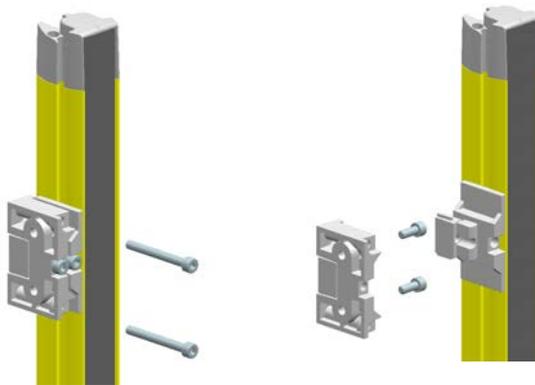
Mounting via swiveling mounting brackets BT-2SB05 and M5 screws
